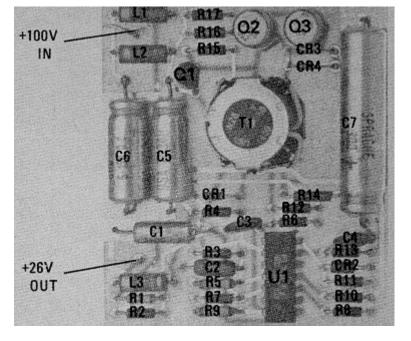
Switching Regulator Board Assembly A9A1 (08555-60056), Figure 8-70 (Change P)
